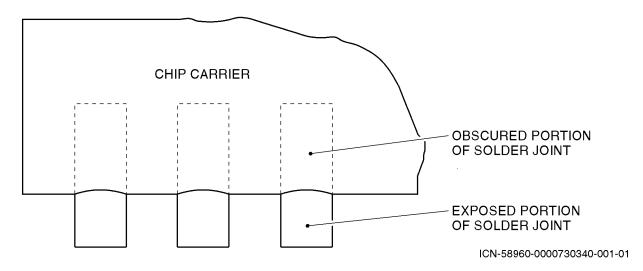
SMT Chip Carrier Solder Joint Inspection
